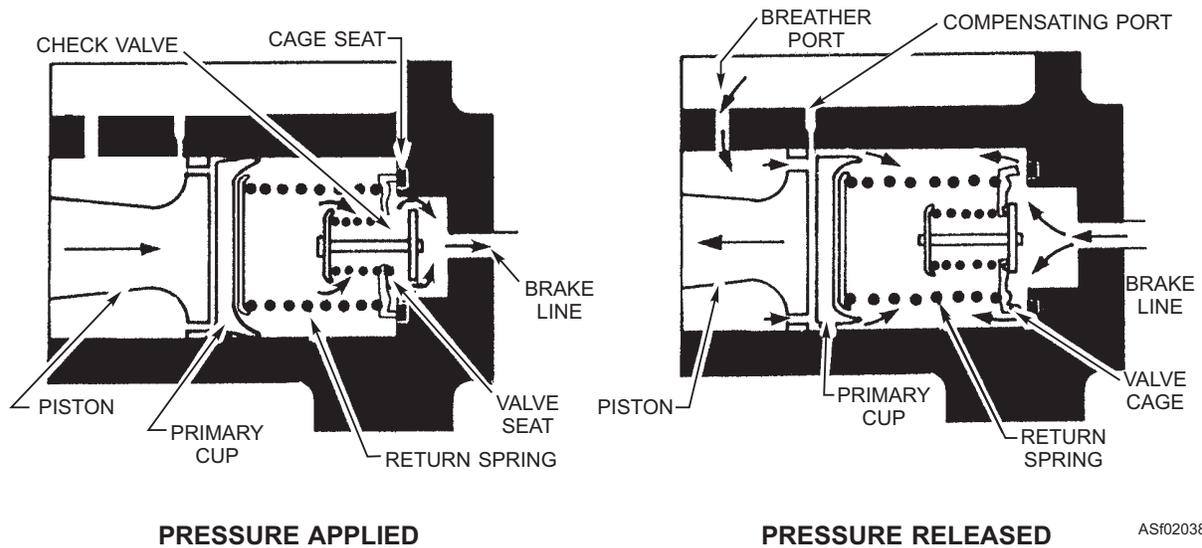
Hydraulic brake master cylinder—operation of two-way valve.
